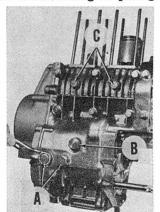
View of lower engine case showing location of oil drain plugs (A), shift cam stopper bolt (B) and crankcase drain plugs (C).
